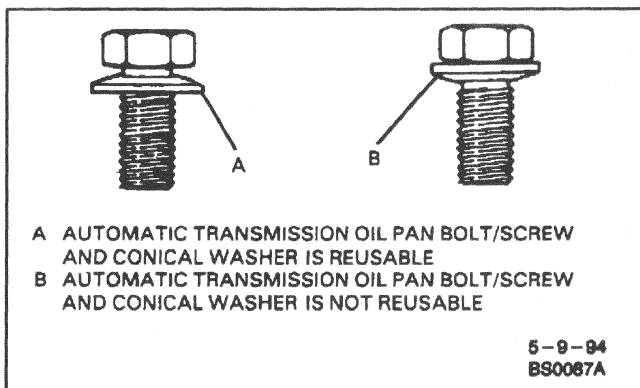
Automatic Transmission Oil Pan Bolt/Screw and Conical Washer
